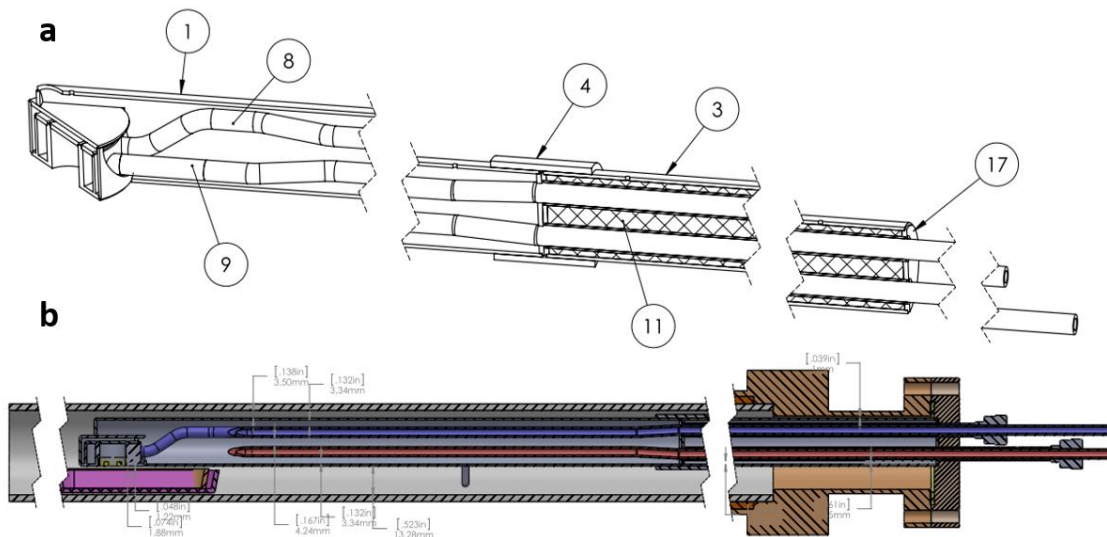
Cutaway views of cooling assembly. (a) Isometric view of cooling chamber and insulating sleeve. (b) Side view of cooling assembly and tube furnace with crucibles for source material.
